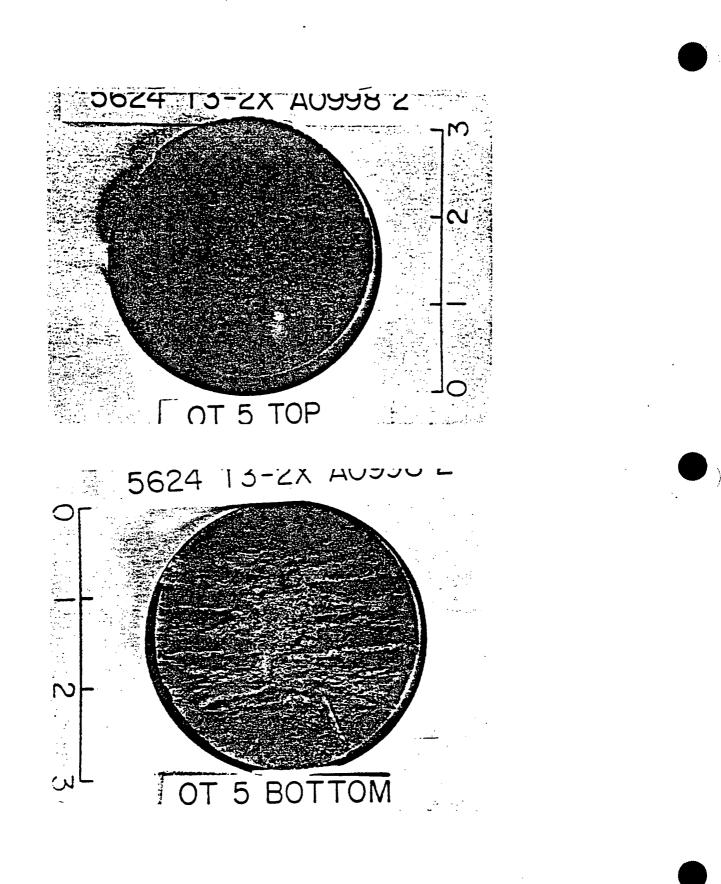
Fracture Surfaces, 5624 T3-2X A0998 2, 0T 5
